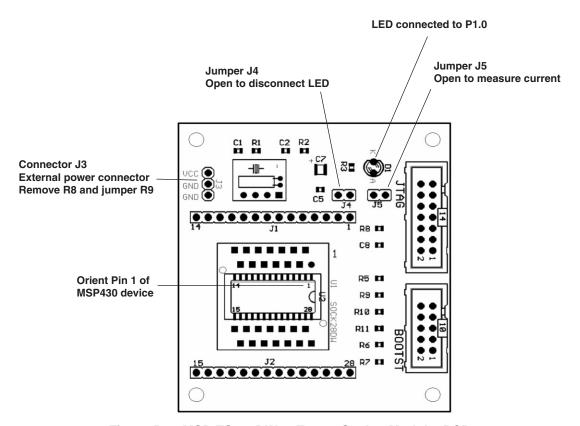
MSP-TS430DW28 Target Socket Module, PCB
